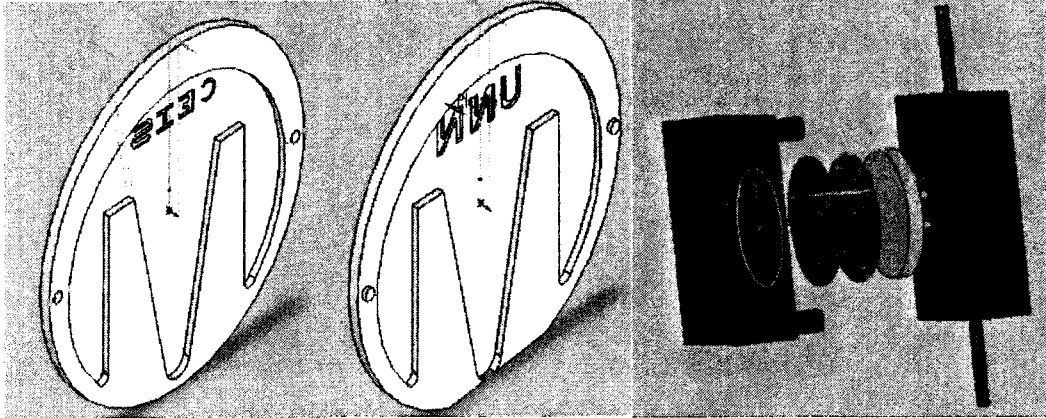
3D design of logo paper clip design showing both sides of insert and mould tool assembly
